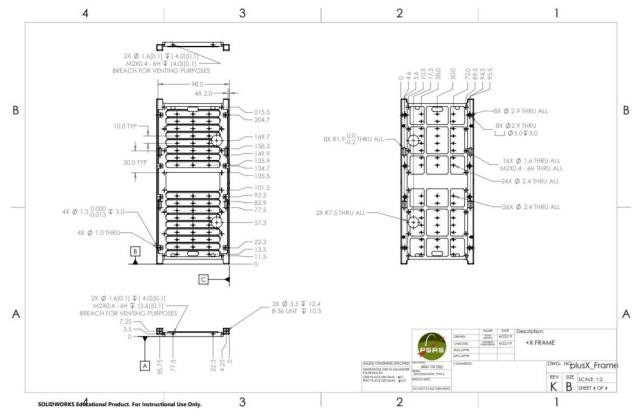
3 of 3 Dimensioned Drawing of the plus X OreSat Frame
